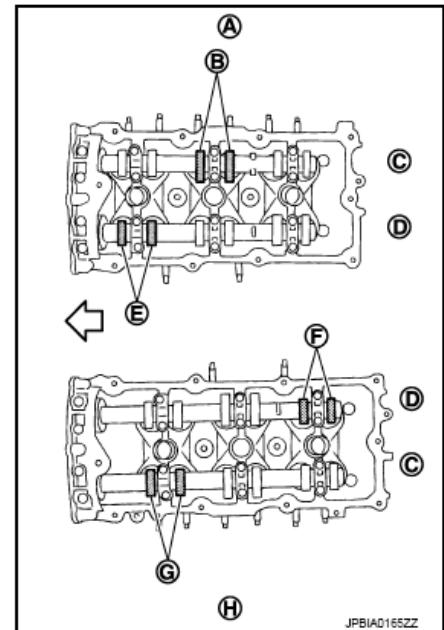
Identifying Valve Clearances Measuring Position (No. 1)
